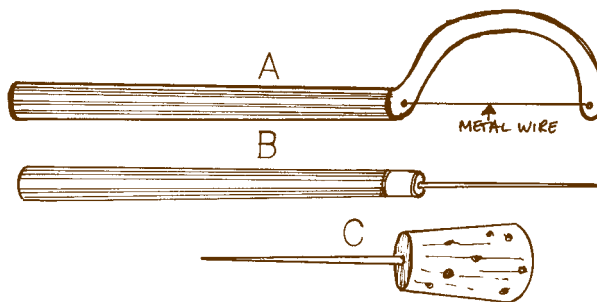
Tools for removing sections of flange or tops of forms. A. Homemade tool with taut metal wire; B. and C. Pin tools.
